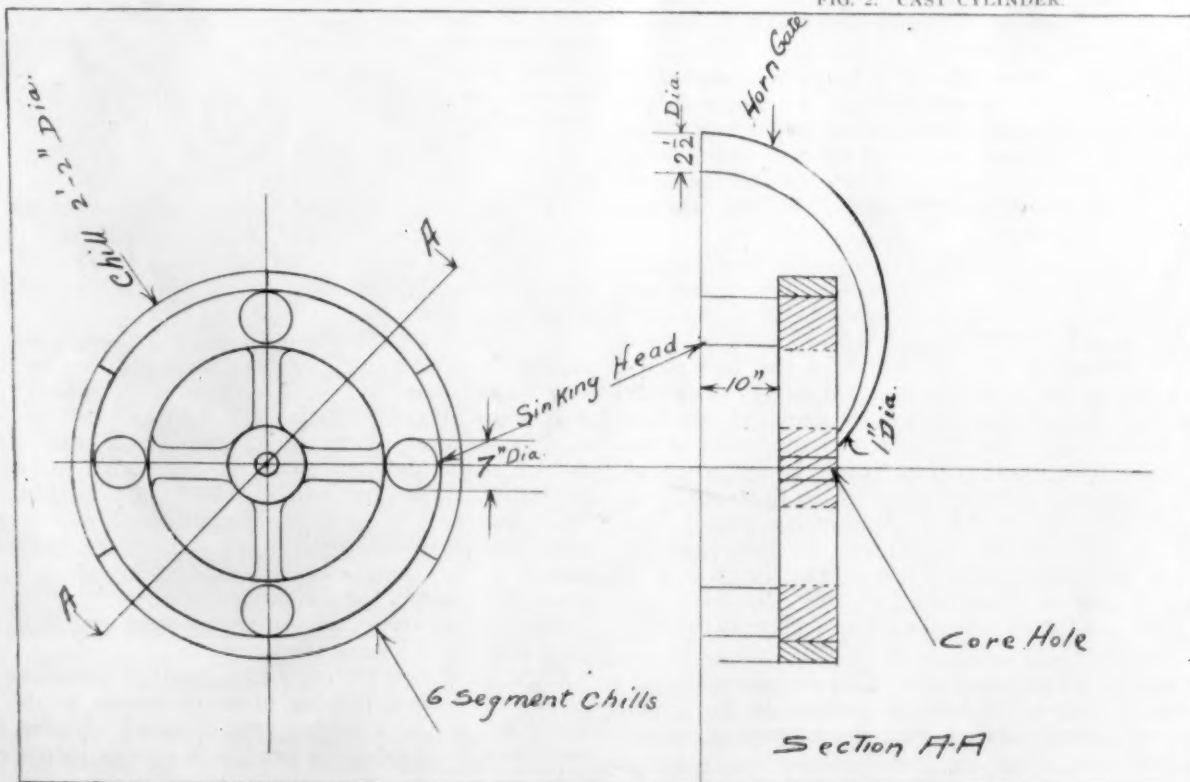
METHOD OF GATING A LARGE GEAR BLANK.
